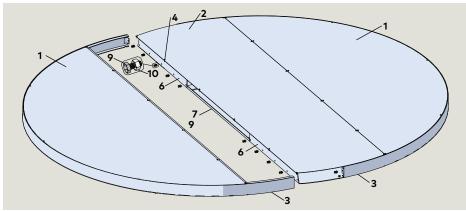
3 1/8" canopy assembly, split for shipment, covers removed
